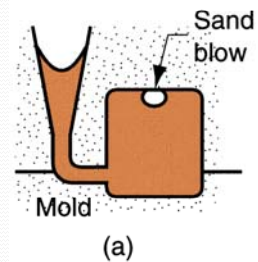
Common defects in sand castings: (a) sand blow
